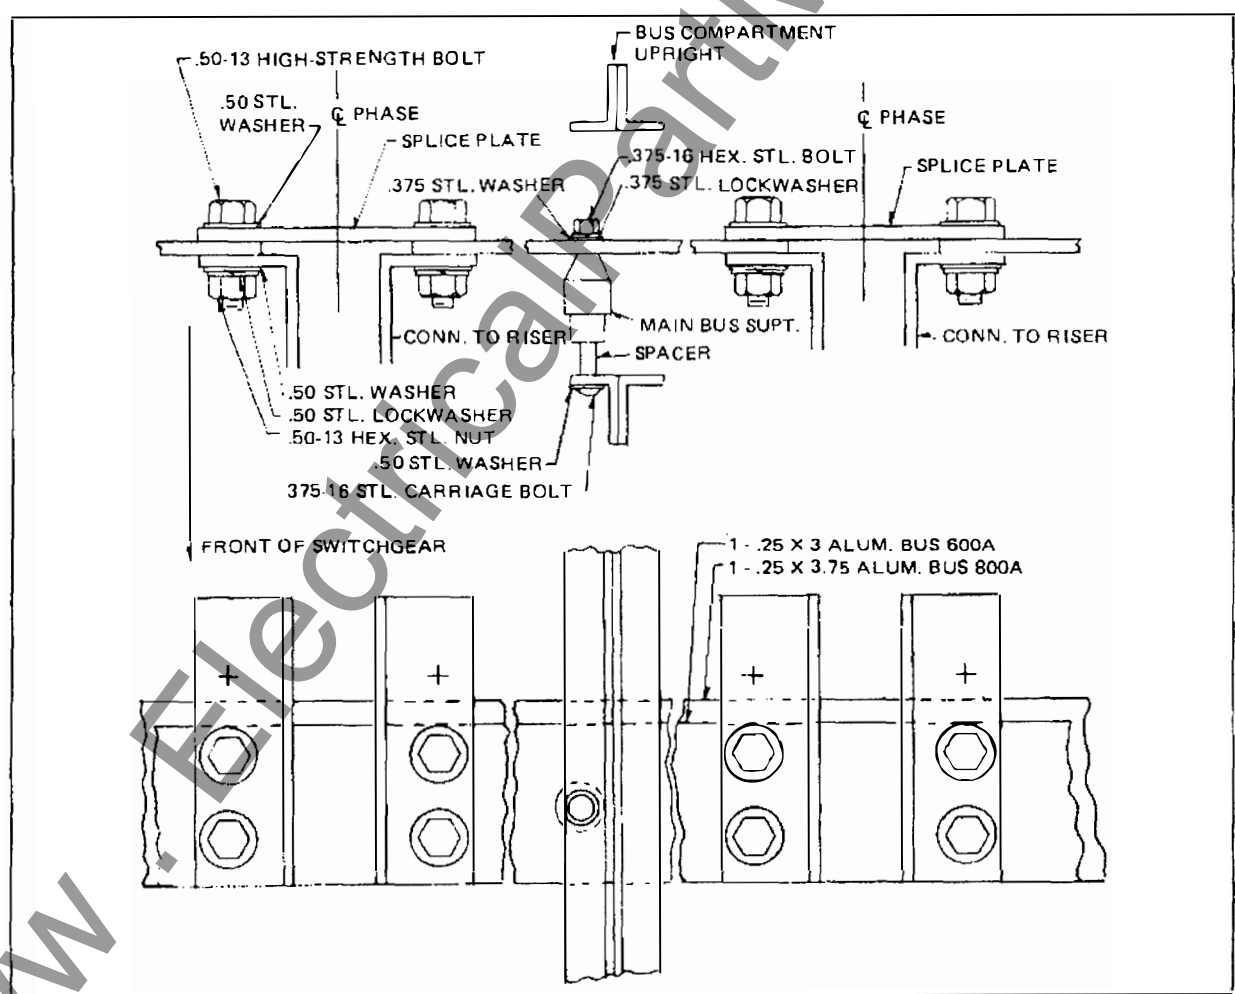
Field Assembly of Joints 600/800 Ampere Bus
